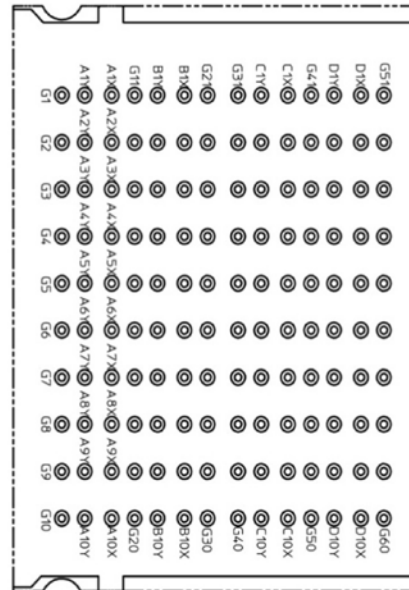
CDFP Style 2 and Style 3 Host PCB Mechanical Layout
